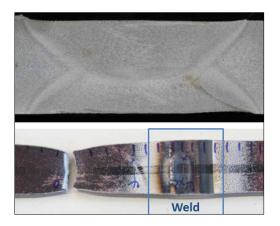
Steel sheets (S235JR) after welding on both sides (top), and after determination of the tensile strength (bottom)
